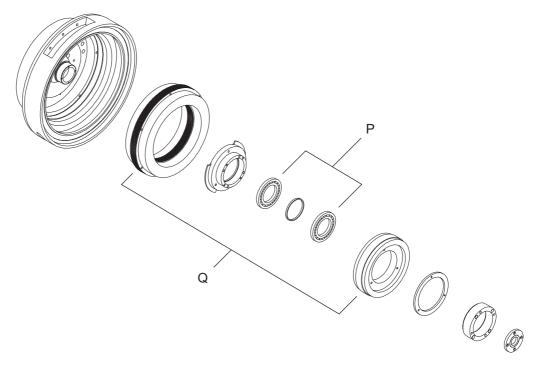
Spare parts: Motor of the ARQ 151 6"/8"
